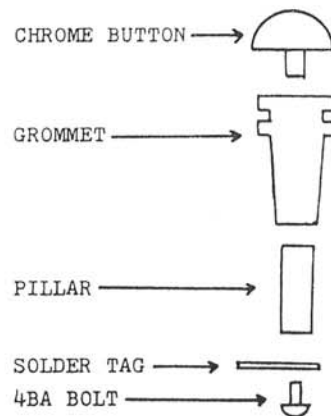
ASSEMBLY OF TOUCH TRIGGER
